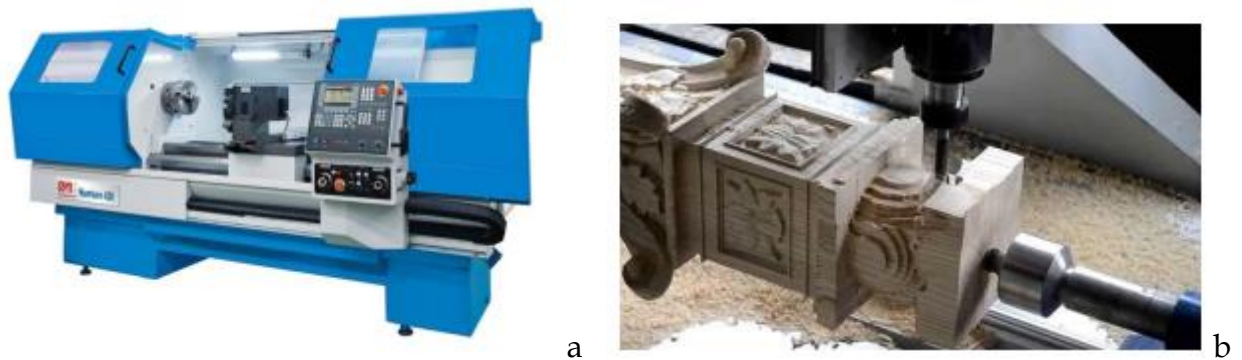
CNC machine tools: a - lathe; b - milling
